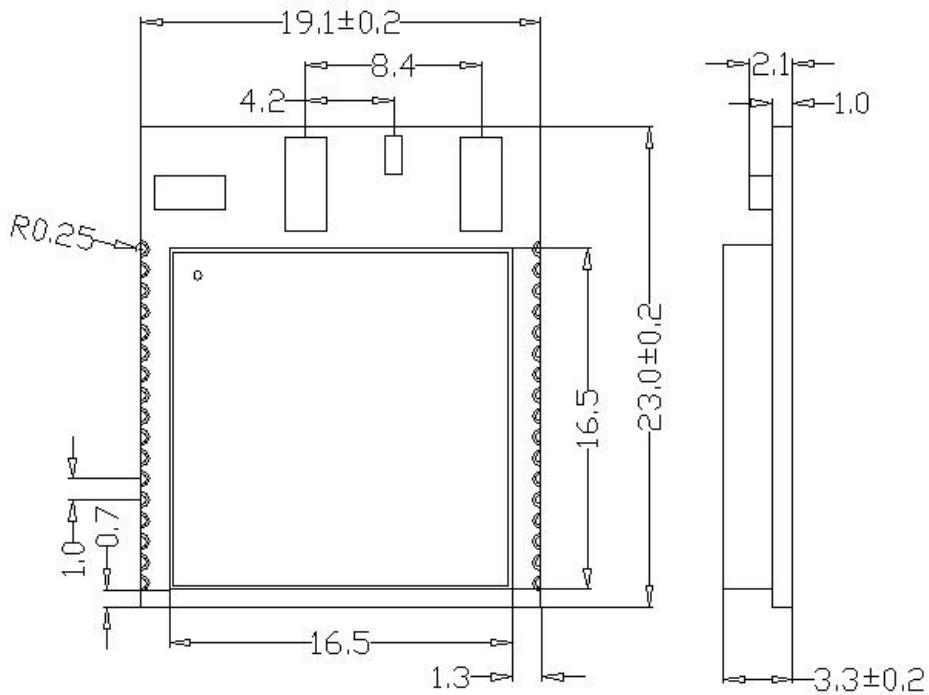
SKU610 PCB Footprint and Dimensions(units: mm)
